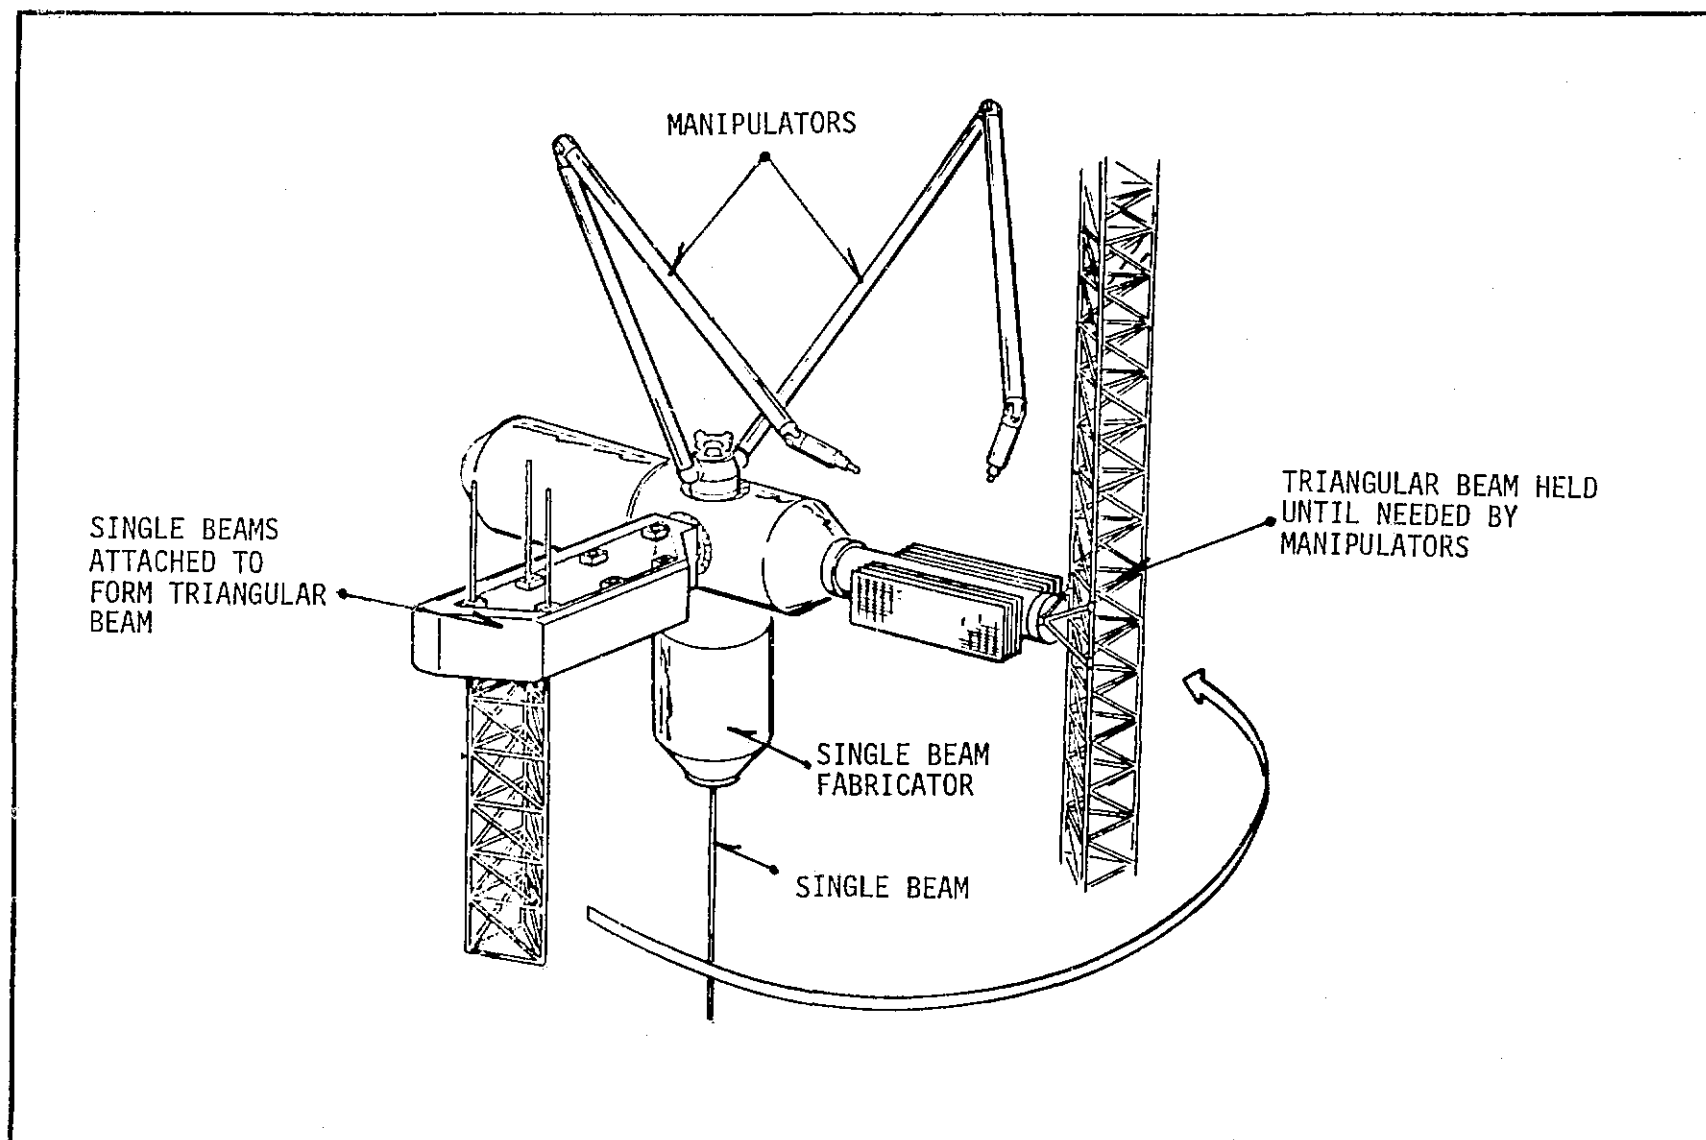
Basic Fabrication/Assembly Module
